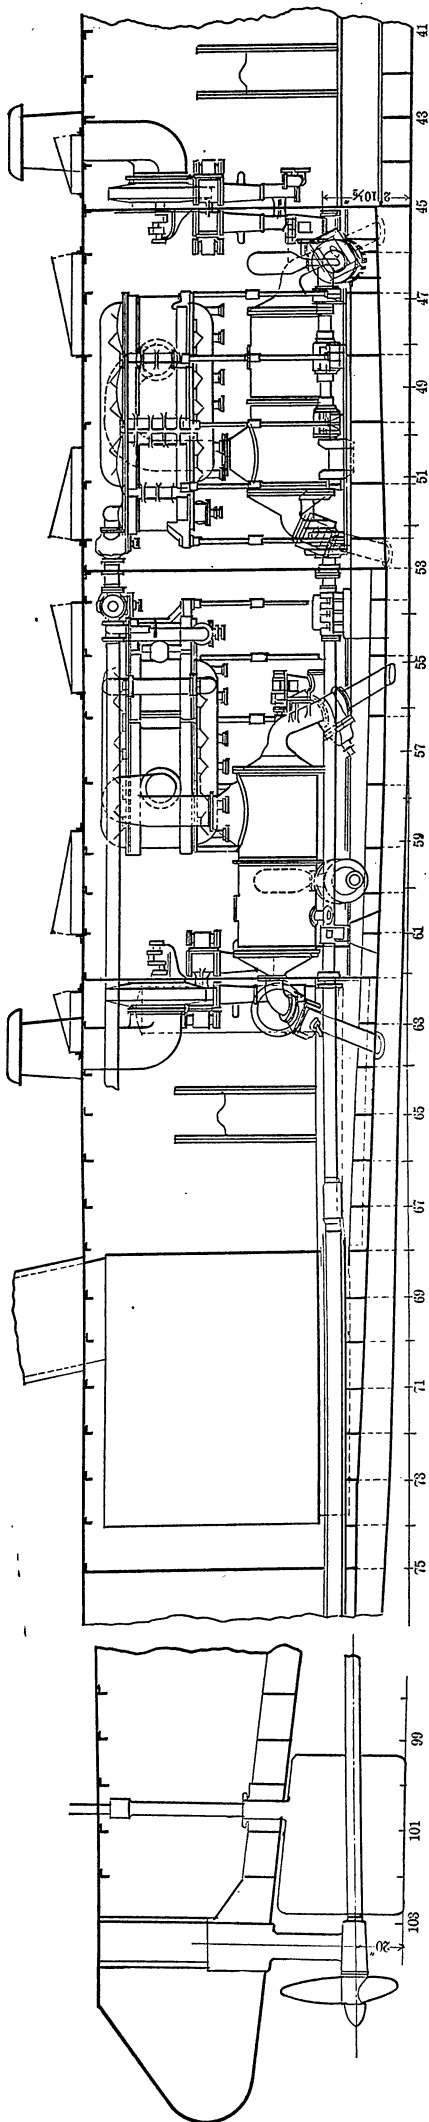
Longitudinal Sectional Elevation of Hull.
